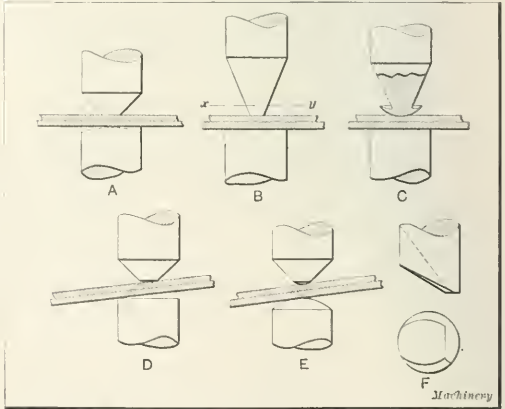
Shape of Electrode Points used on Electric Spot-welding Machine for Various Purposes
